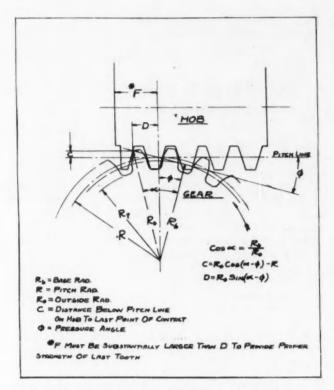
Method of calculating the last point of contact of a gear tooth with a hob tooth, and of finding the last cutting position for setting a hob
